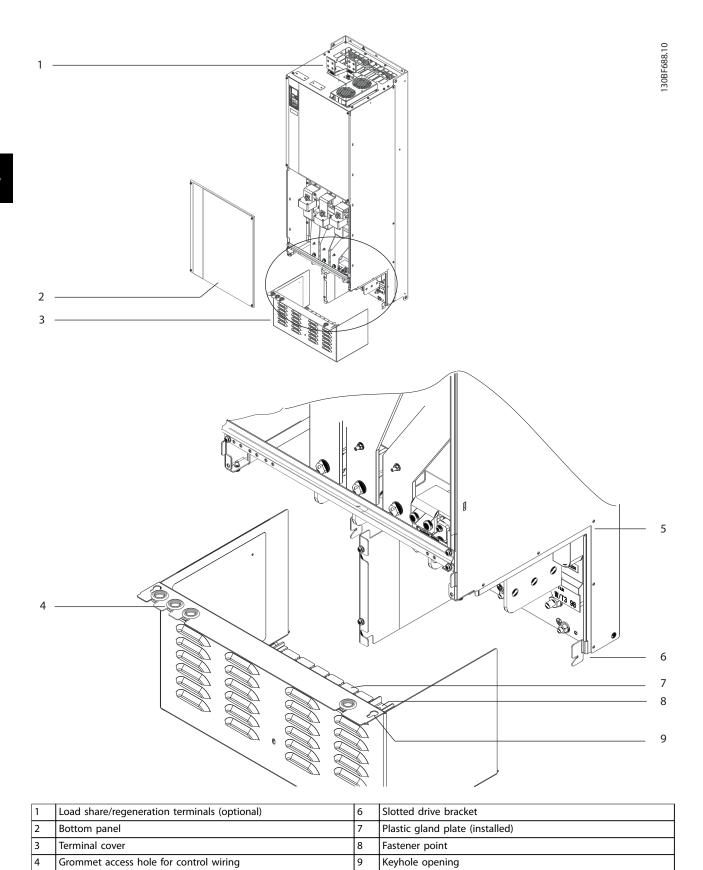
Assembling the Gland Plate and Terminal Cover
